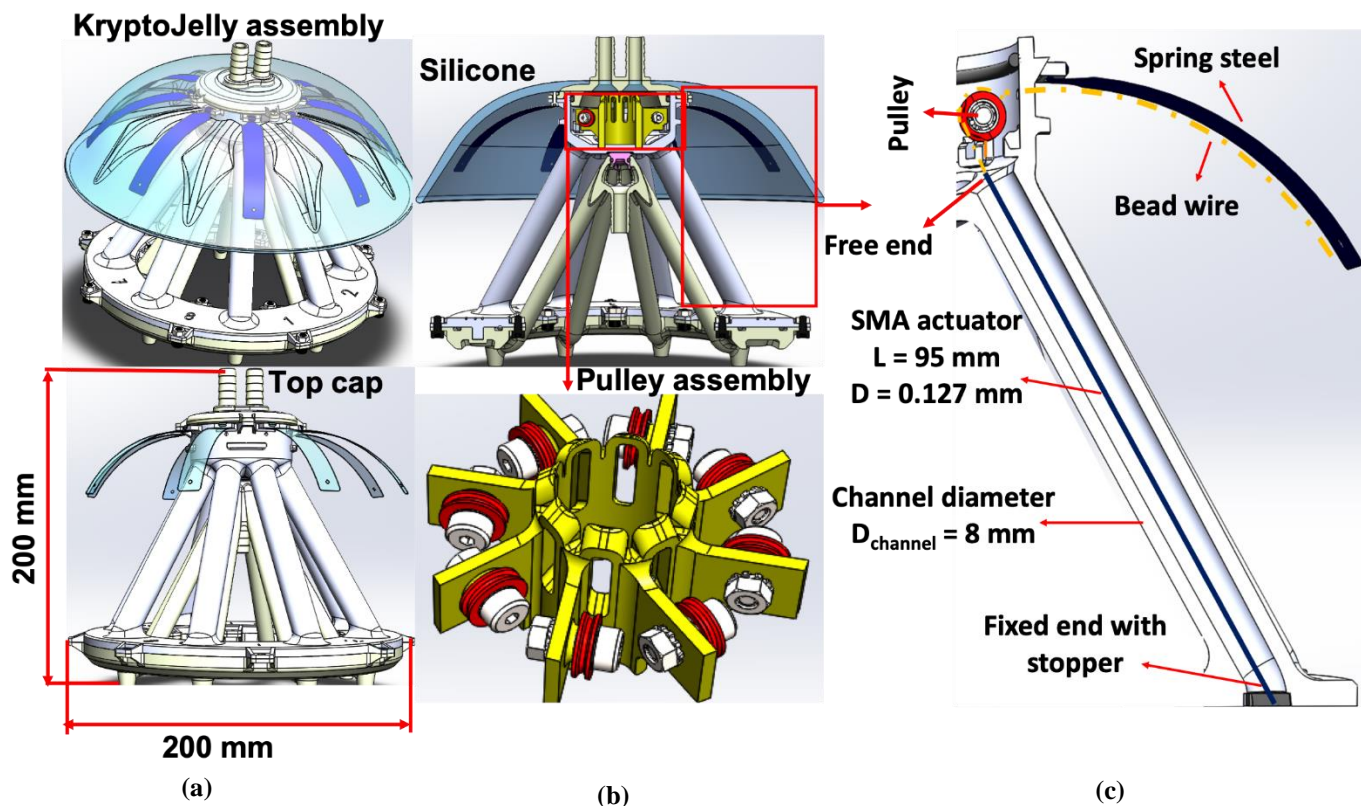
Design and assembly of KryptoJelly: (a) CAD design of the robot showing major components and assembly of the jellyfish robot, (b) sectional view and detailed pulley assembly, (c) a detailed sectional view of actuator connection in a channel that can be used to easily replace actuators or cooling.
